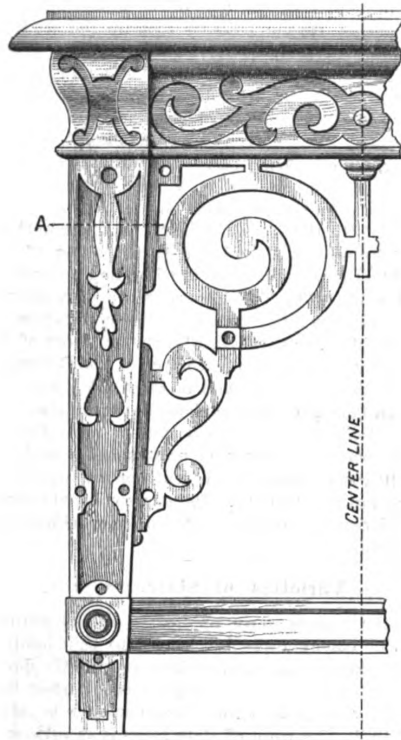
Partial Elevation of Carved Stool.—Scale, 3 Inches to the Foot.
